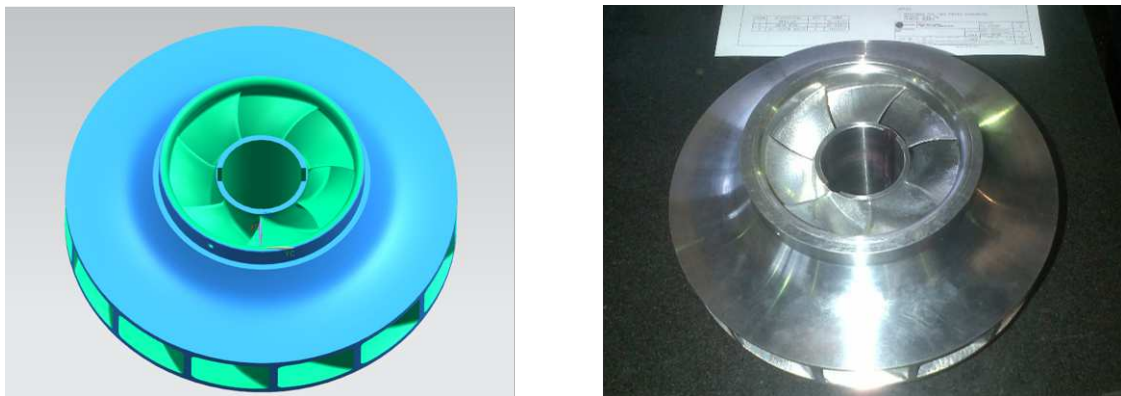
Impeller eye view of the 3D CAD and of the real impeller obtained by means of Lost-foam casting technology.
